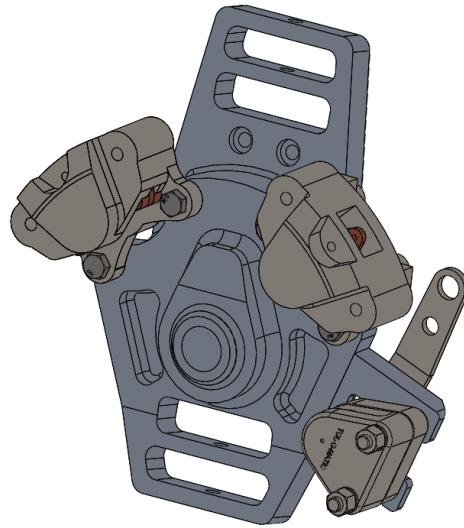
View of dual-primary calipers and parking caliper on front suspension upright
